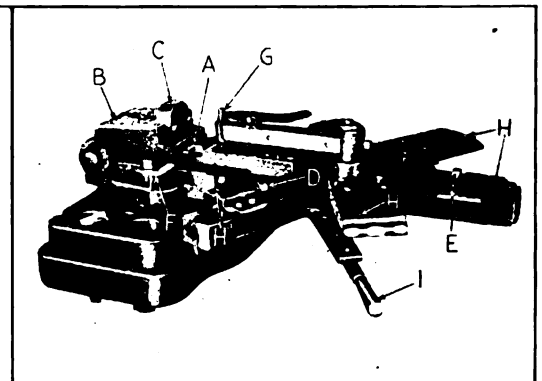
DETAILS OF PUNCH AND INDEXING FIXTURE
